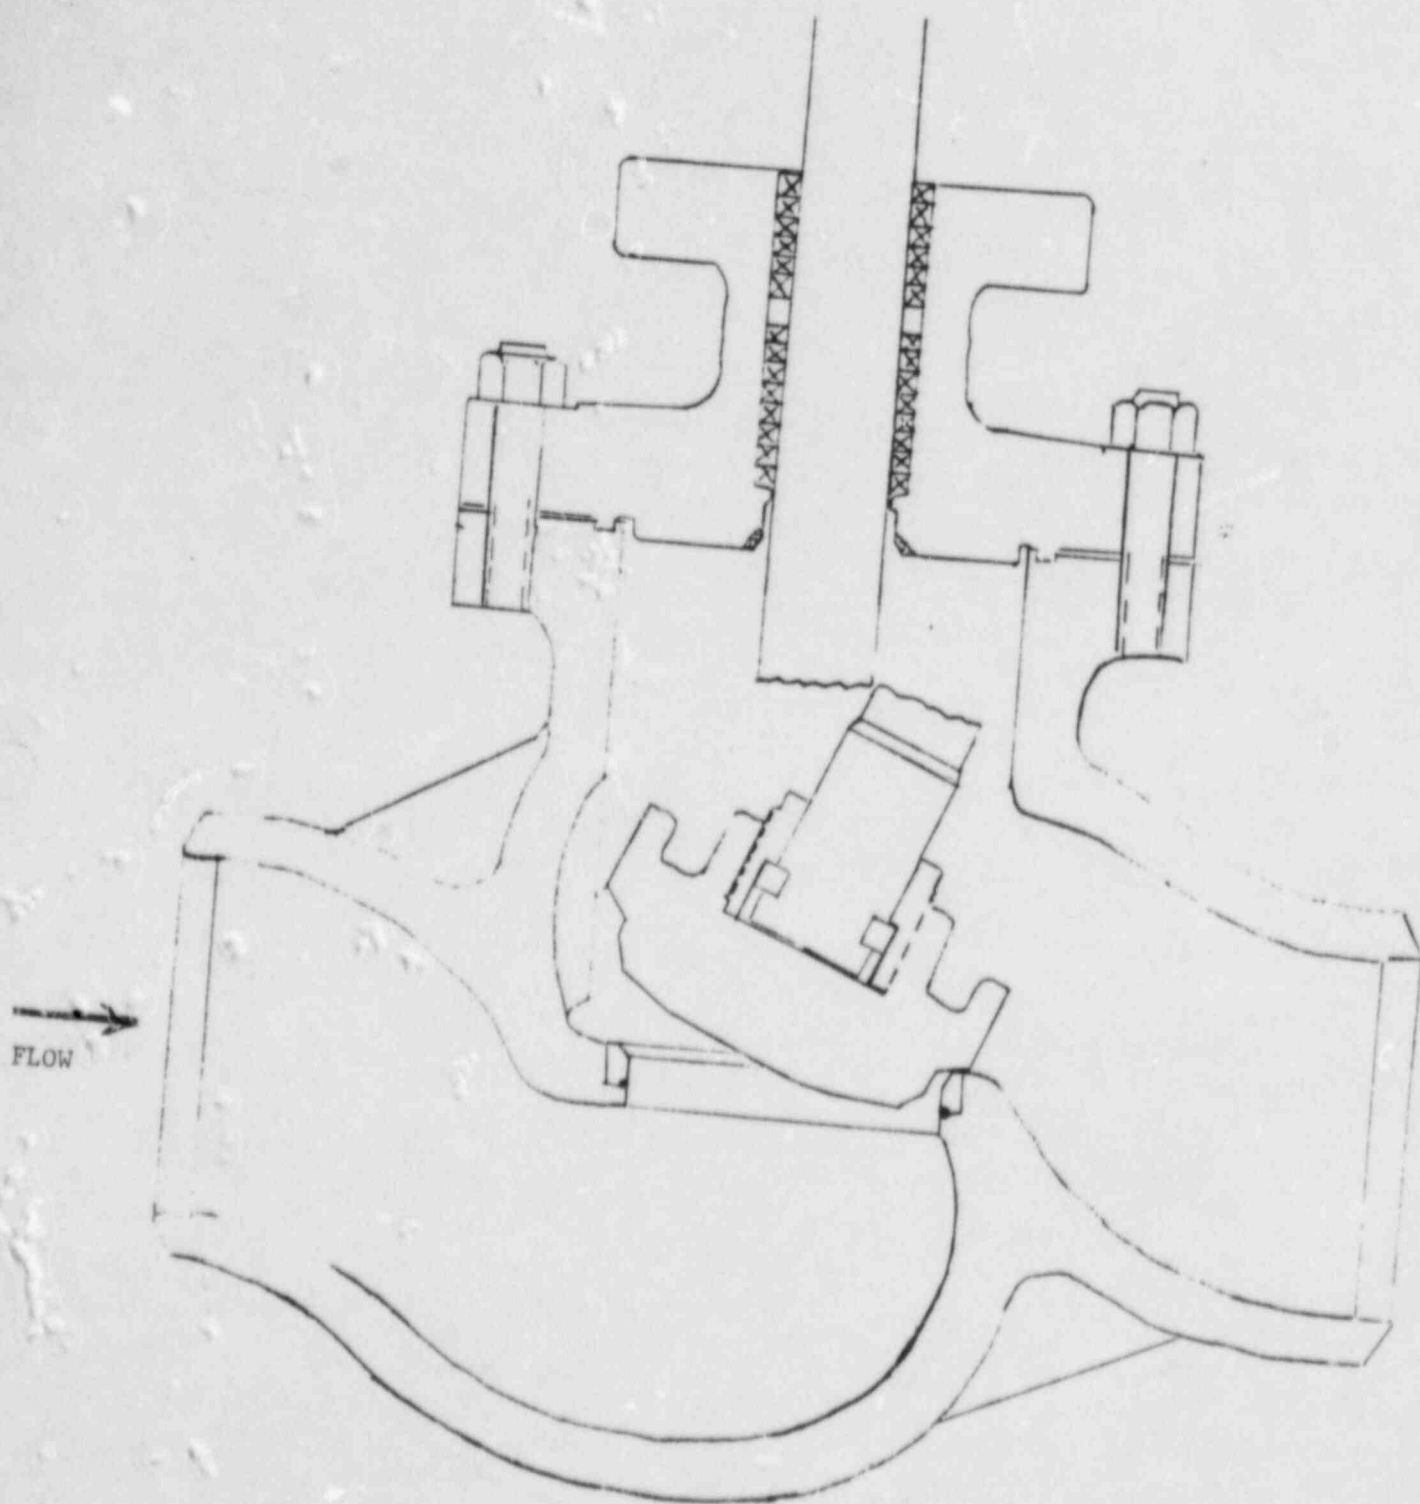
VIEW SHOWING FO10 VALVE WITH CRACKED
